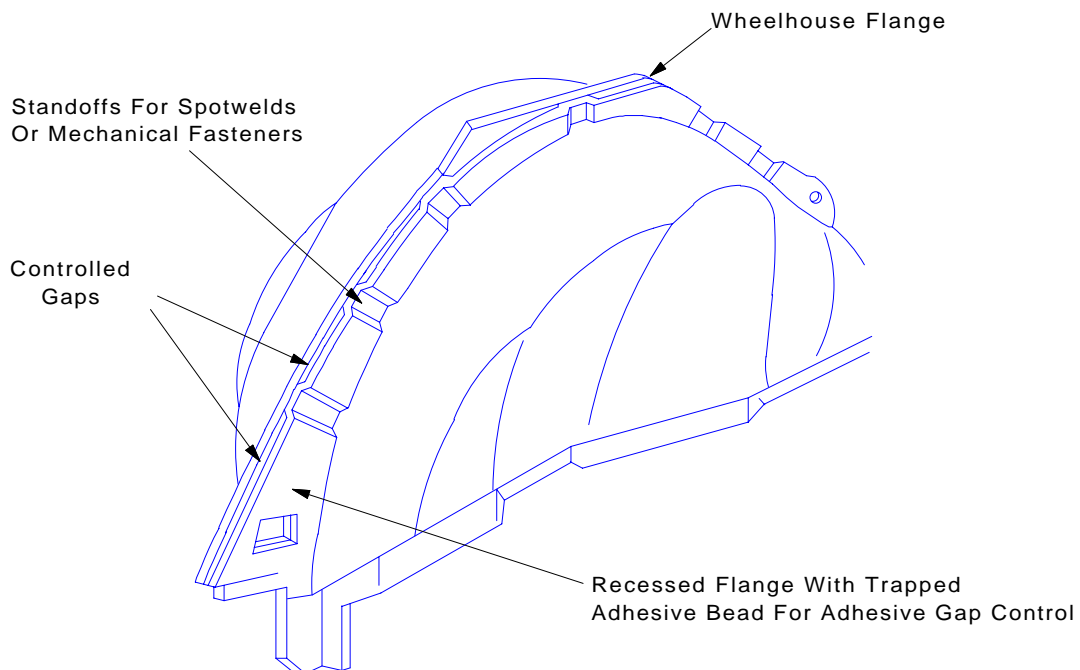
Standoffs utilized to form controlled gaps for adhesive and provide surfaces for spotwelds or mechanical fasteners¹⁸
